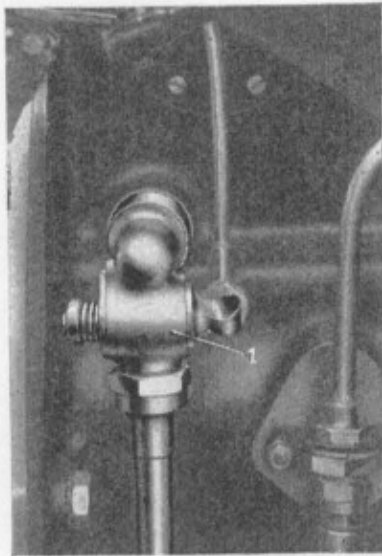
CYLINDER JACKET DRAIN TAP.
